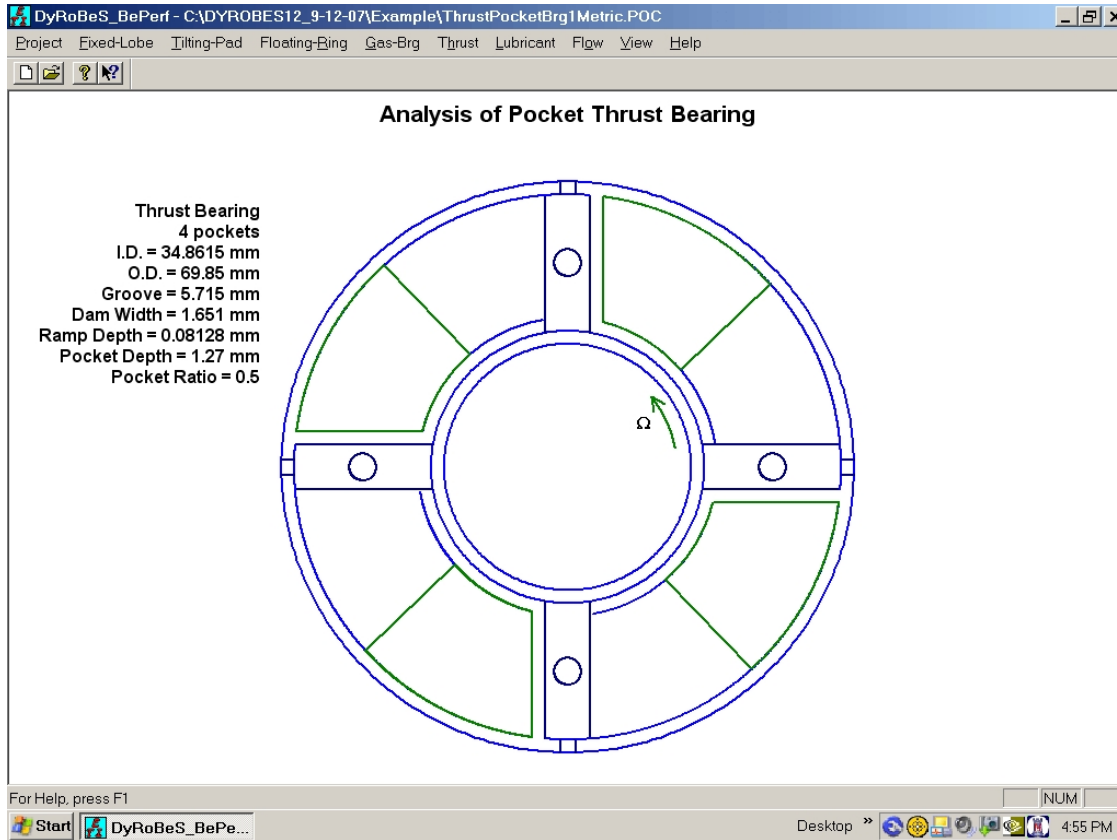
View of Pocket Thrust Bearing With Metric Dimensions
